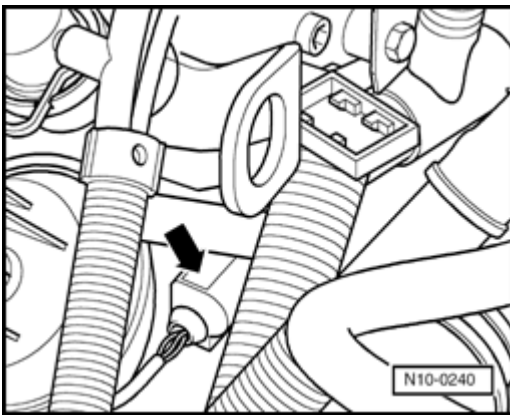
Locating Engine Coolant Temperature Sensor G62
